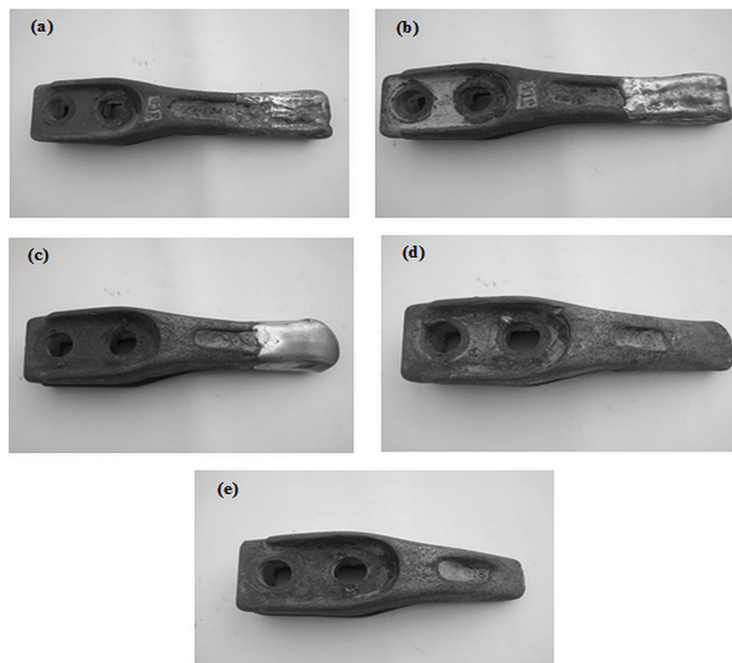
Hardfaced excavator bucket teeth after field test for 480 hr. (a) H33Cr hardfaced tooth. Leading edge is still completely covered by hardfacing. (b) H23Cr hardfaced tooth. Hardfacing partially removed from the leading edge. (c) H6.25Cr hardfaced tooth. Significant amount of metal was removed from the leading edge. (d) H2Cr hardfaced tooth. Hardfacing on the tooth was removed almost along the entire leading edge. (e) Un-hardfaced tooth. Large amount of metal was removed from the leading edge.
